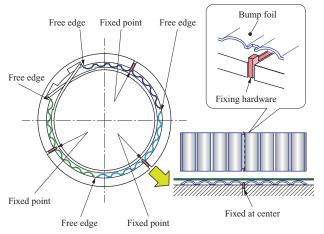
Schematic cross sectional view of foil-type dynamic radial gas bearing designed to have bump foil with three segmental structure
